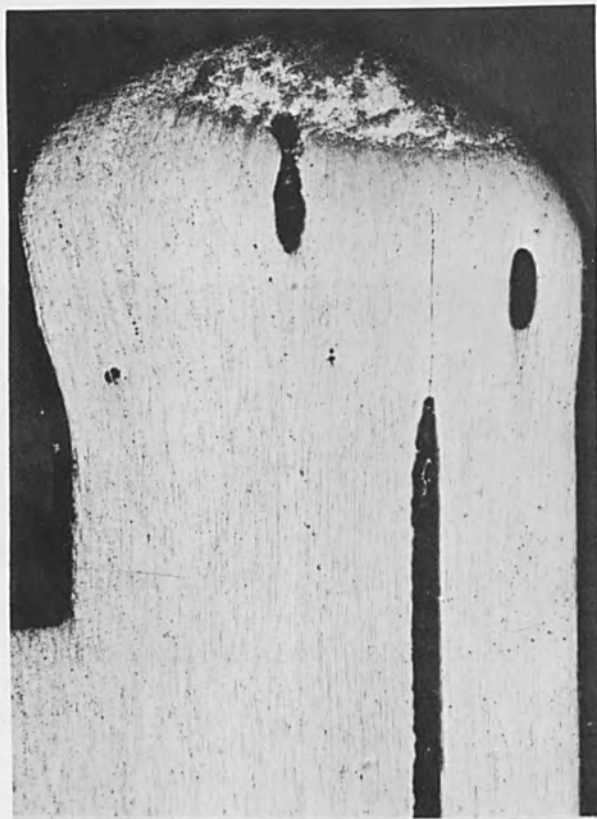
Type a - welding of S.A.P. 930 undegassed. X25
